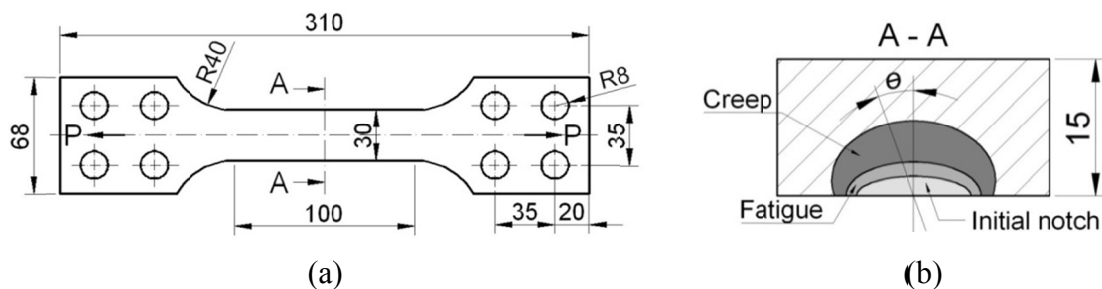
Geometry of a thumbnail crack specimen: (a) a whole geometry; (b) an enlarged section view on A-A.
